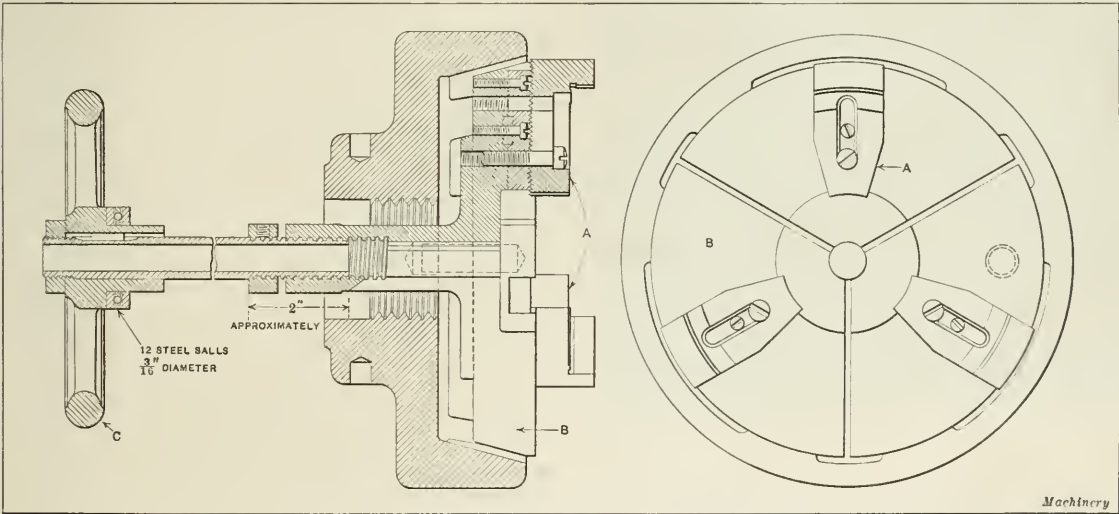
Combination Collet and Adjustable Jaw Chuck for holding Bushings, Gears, etc.
